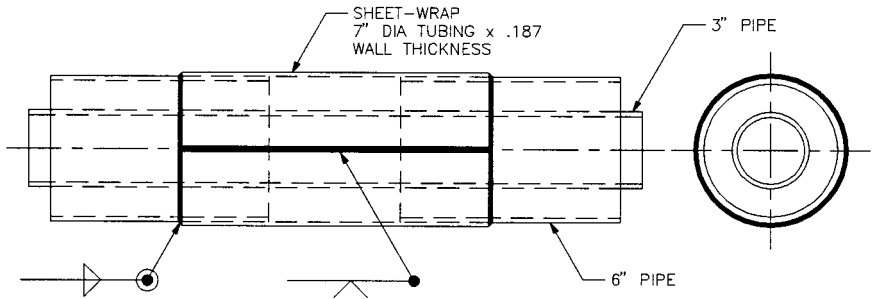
Cross-sectional view of an assembled sheet wrap.
